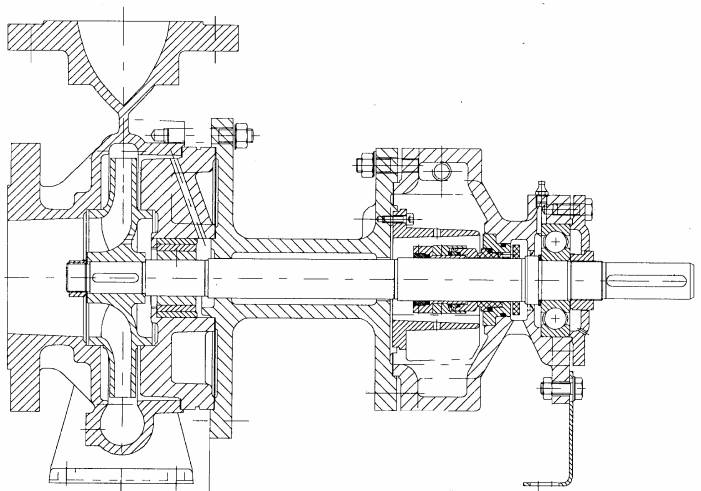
Pump with uncooled seal at the “cold end”
